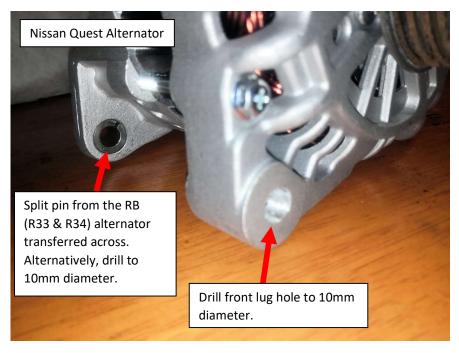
Transfer OR Drill Split Pin and Drill Front Lug Hole
